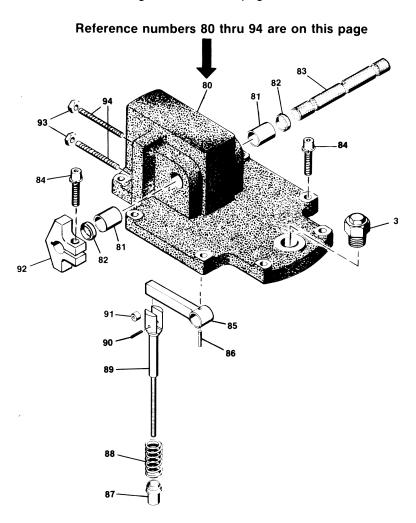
Parts for the TG-13 and -17 Cover Assembly (Lever Speed Setting) for Use with Cast-Iron Case TG-13 and -17
